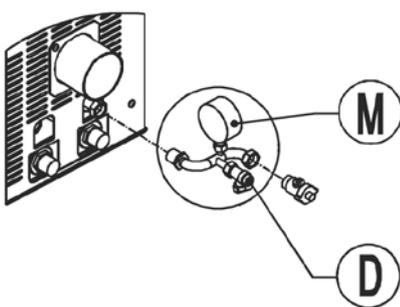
Terminal with filling valve (D) and pressure gauge (M)
